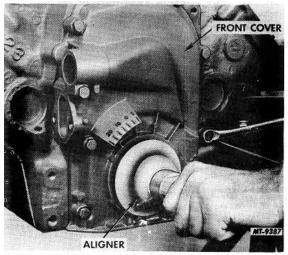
Aligning Engine Front Cover Assembly to Cylinder Block Using SE-1949 Aligner
